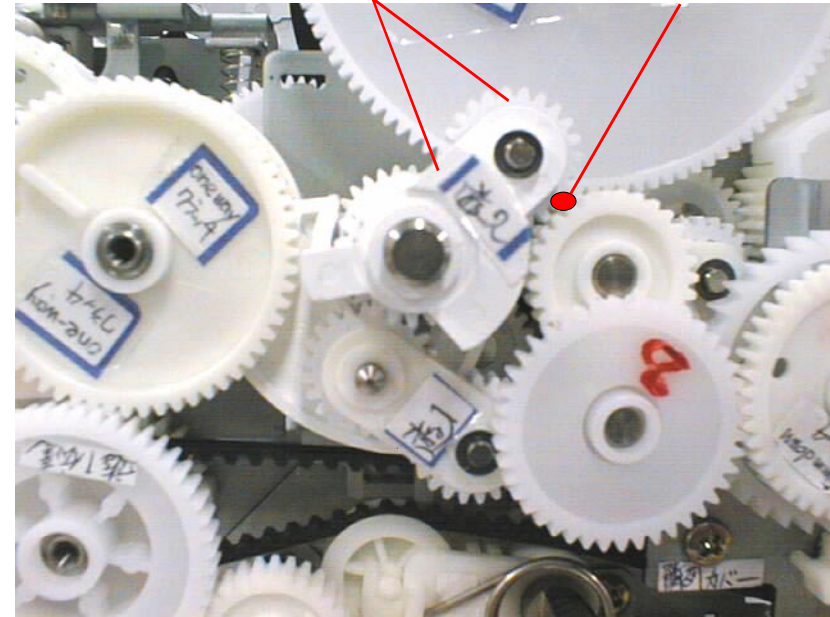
Condition of Planetary Gear 2 with Paper Tray Installed
